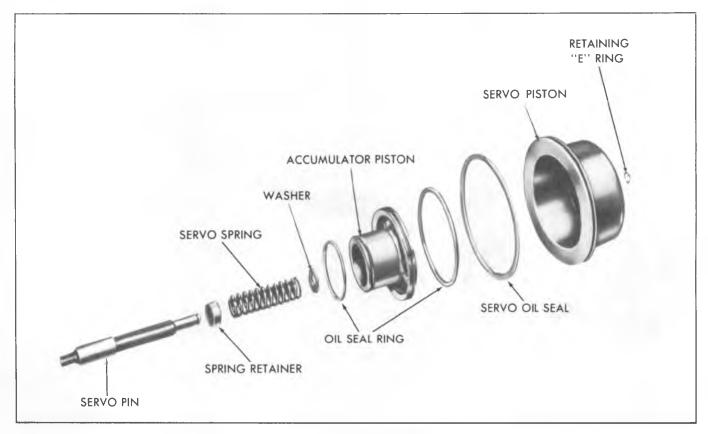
T--Rear Servo and Accumulator Assembly--Exploded View
